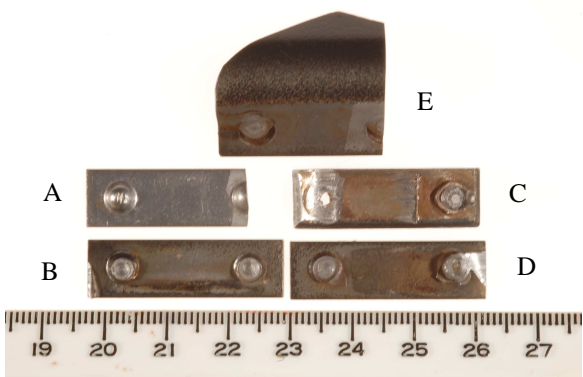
various tabs that have all failed the “chisel test” except “A” – it has not been welded but was sectioned.
